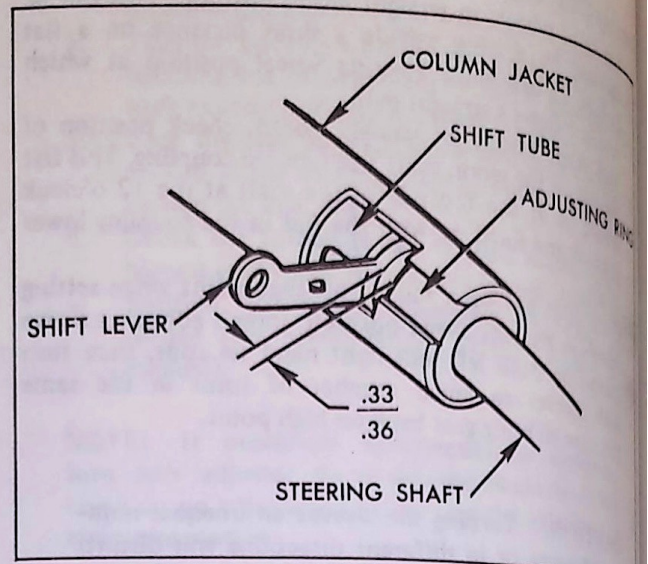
Shift Tube Adjustment — Automatic Transmission
